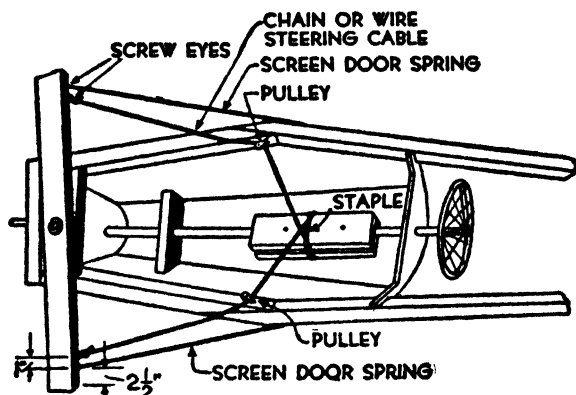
DETAIL OF STEERING GEAR SHOWN FROM BELOW
